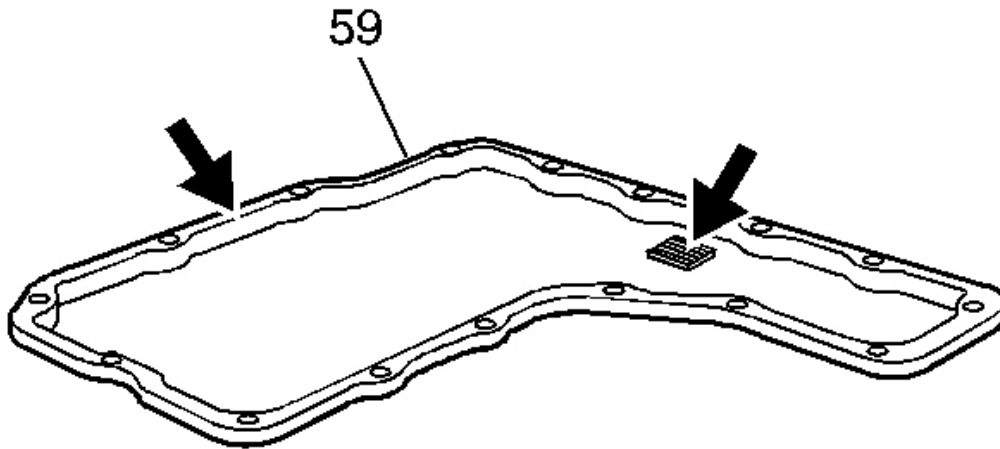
Locating Inspection Areas On Sealing Surface & Bottom Pan Magnet
